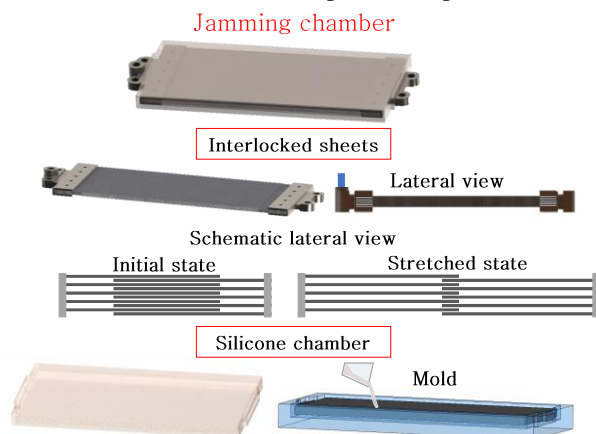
The layer jamming chamber is constituted of 10 interlocked sheets within a silicone chamber made by molding.
